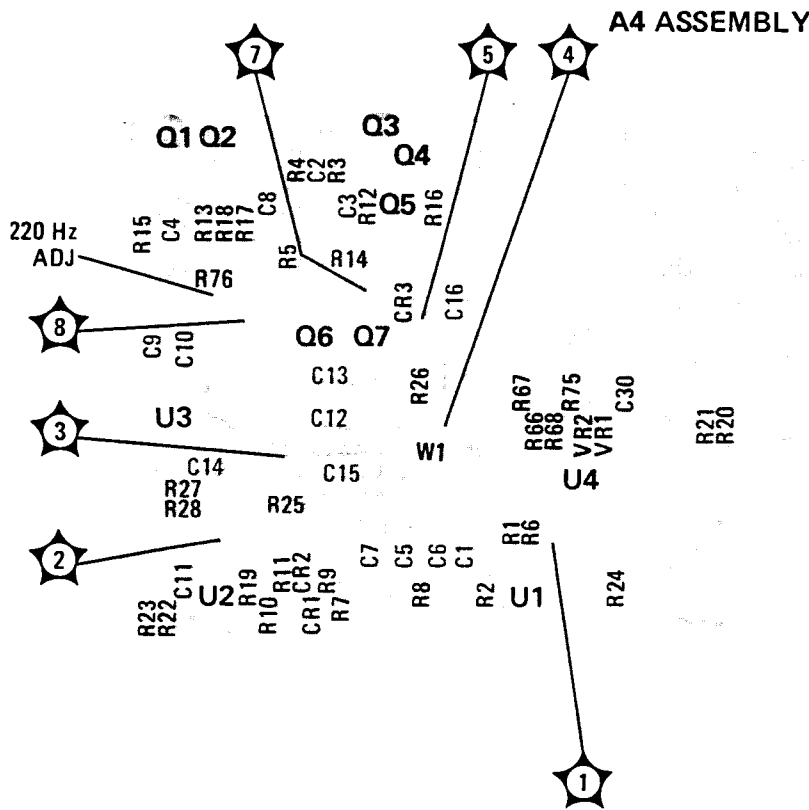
P/O A4 Assembly (AC Ampl/Sync Detector) Component and Test Point Locations Backdating (P/O Change C)
